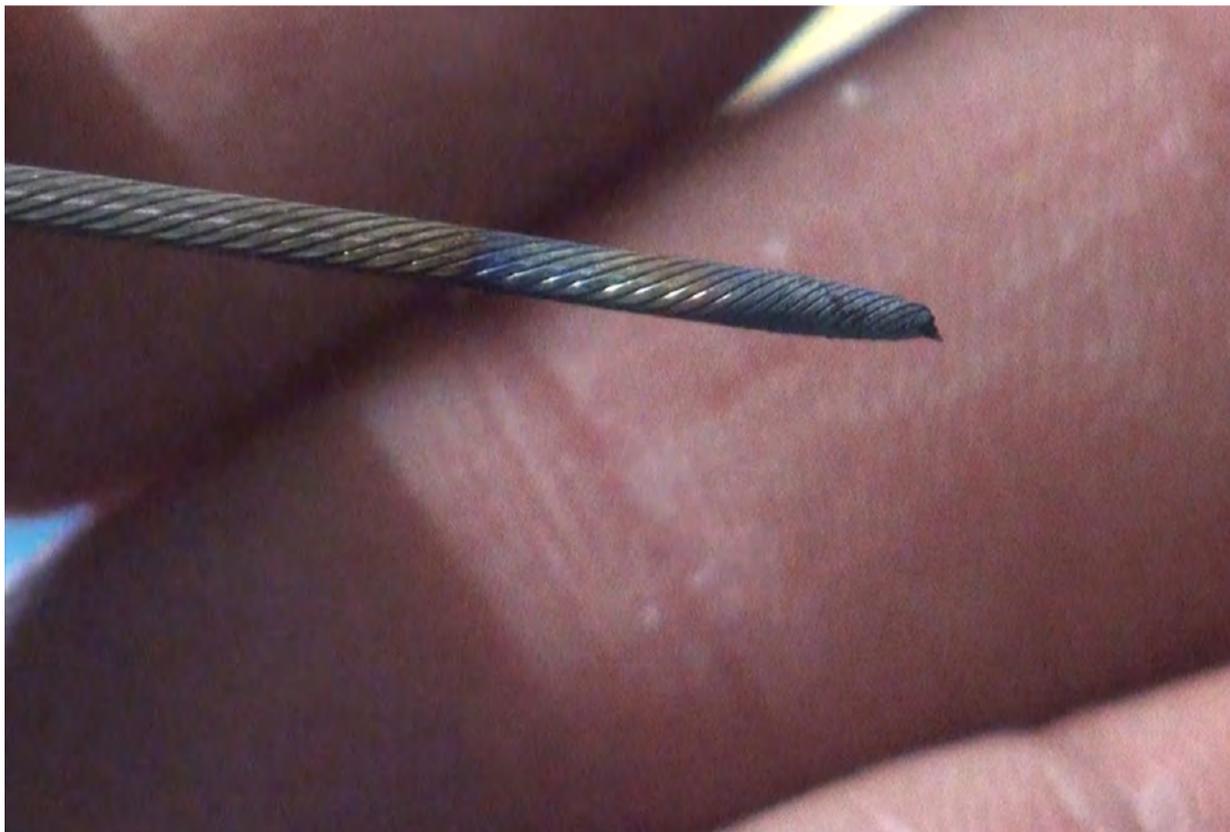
“Twist Weld” Cable End Treatment
